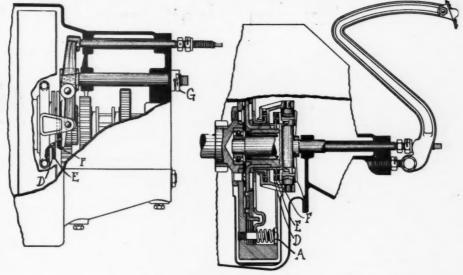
HUPMOBILE CLUTCH ADJUSTMENTS
